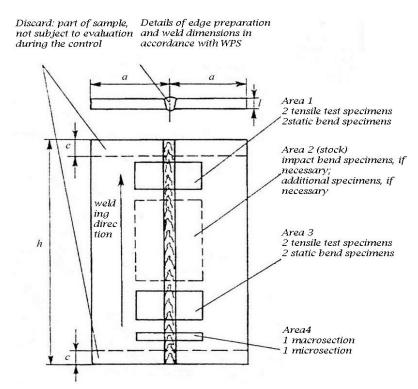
Test assembly of welded butt joint and the diagram of test specimens' cutting-out:
